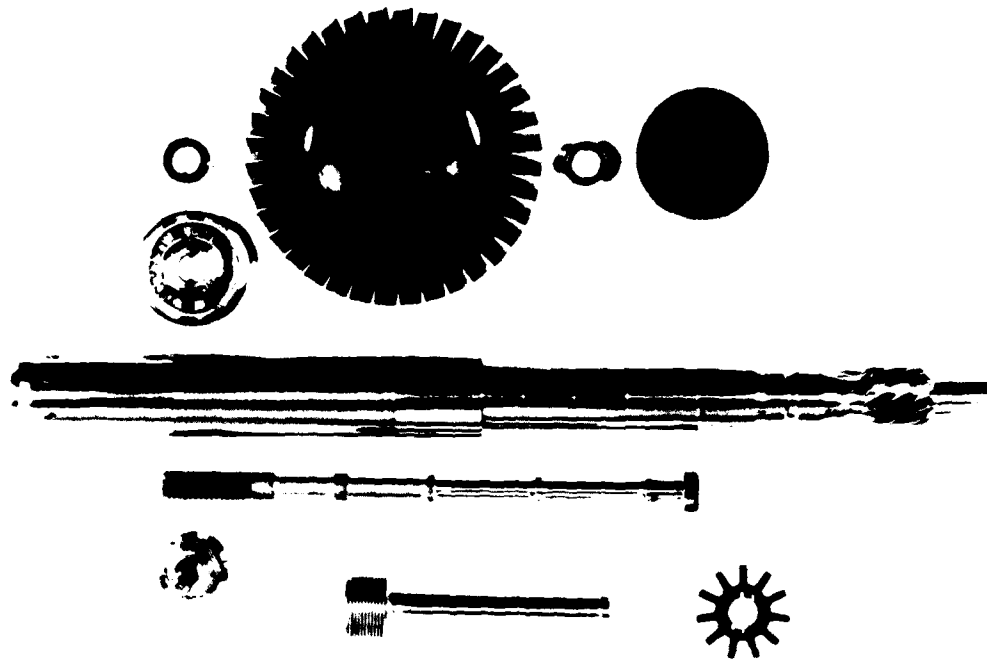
Ceramic Turbine Rotor 1195, Attachment Hardware and Main Shaft
